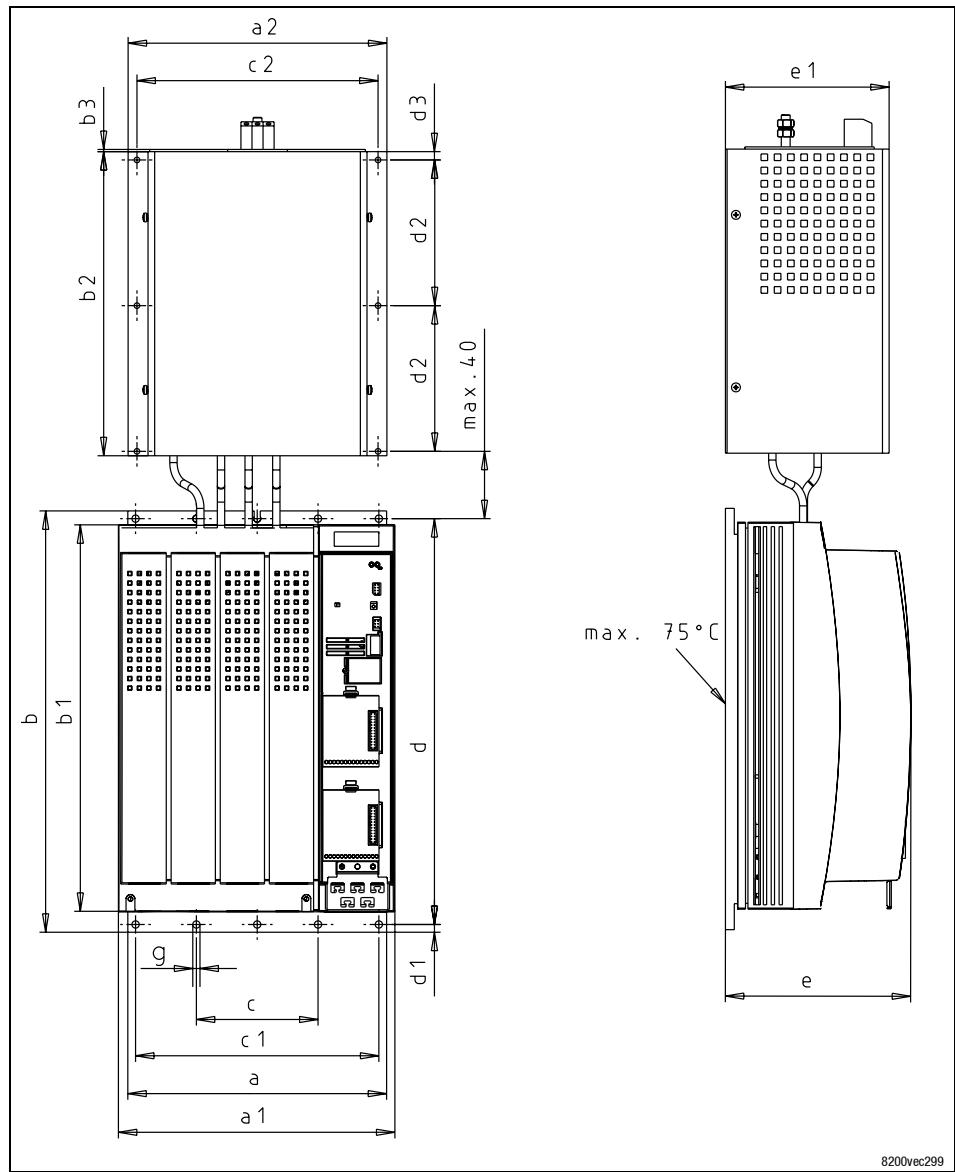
Dimensions for 8200 vector in "cold plate" technique 15 ... 22 kW
